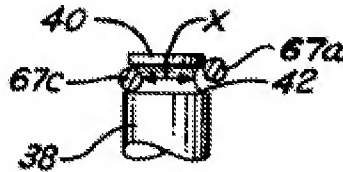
A depicts an "installation tool positioned in a groove of a drive shaft of a vacuum cleaner." Lawroski, col. 2, ll. 1-3.
